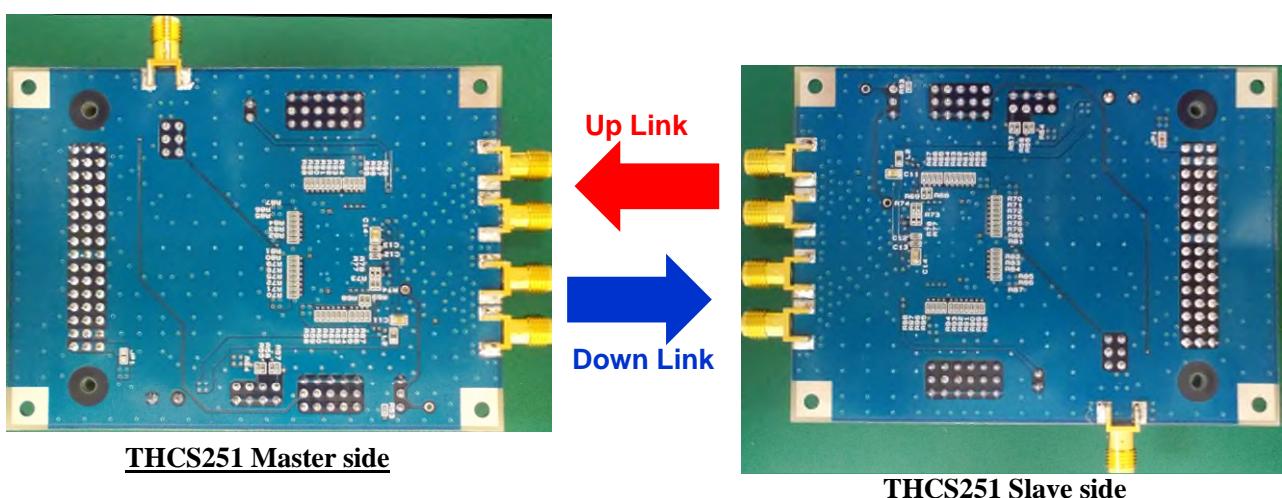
THEVA251-SMA-V3 Master Side / Slave Side bottom view
